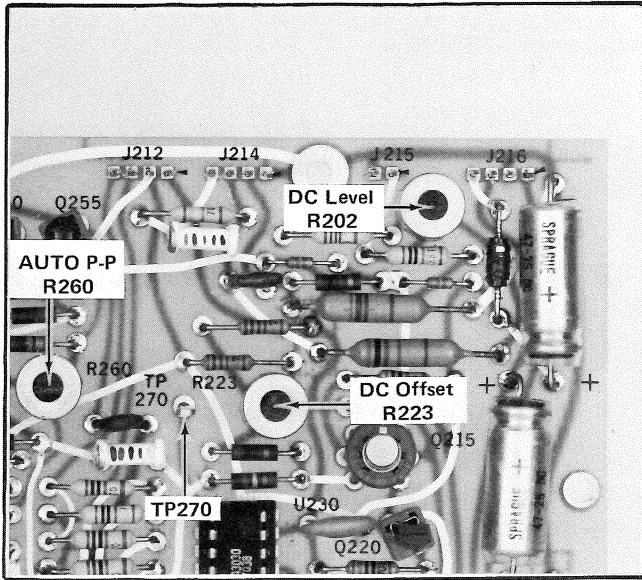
Location of TP270, R223, R202 and R260 on the Sweep Board.
